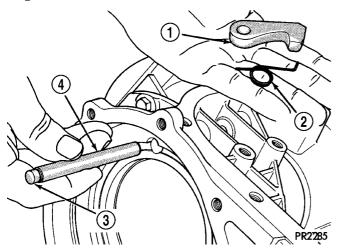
Parking Pawl, Return Spring, and Pivot Shaft
